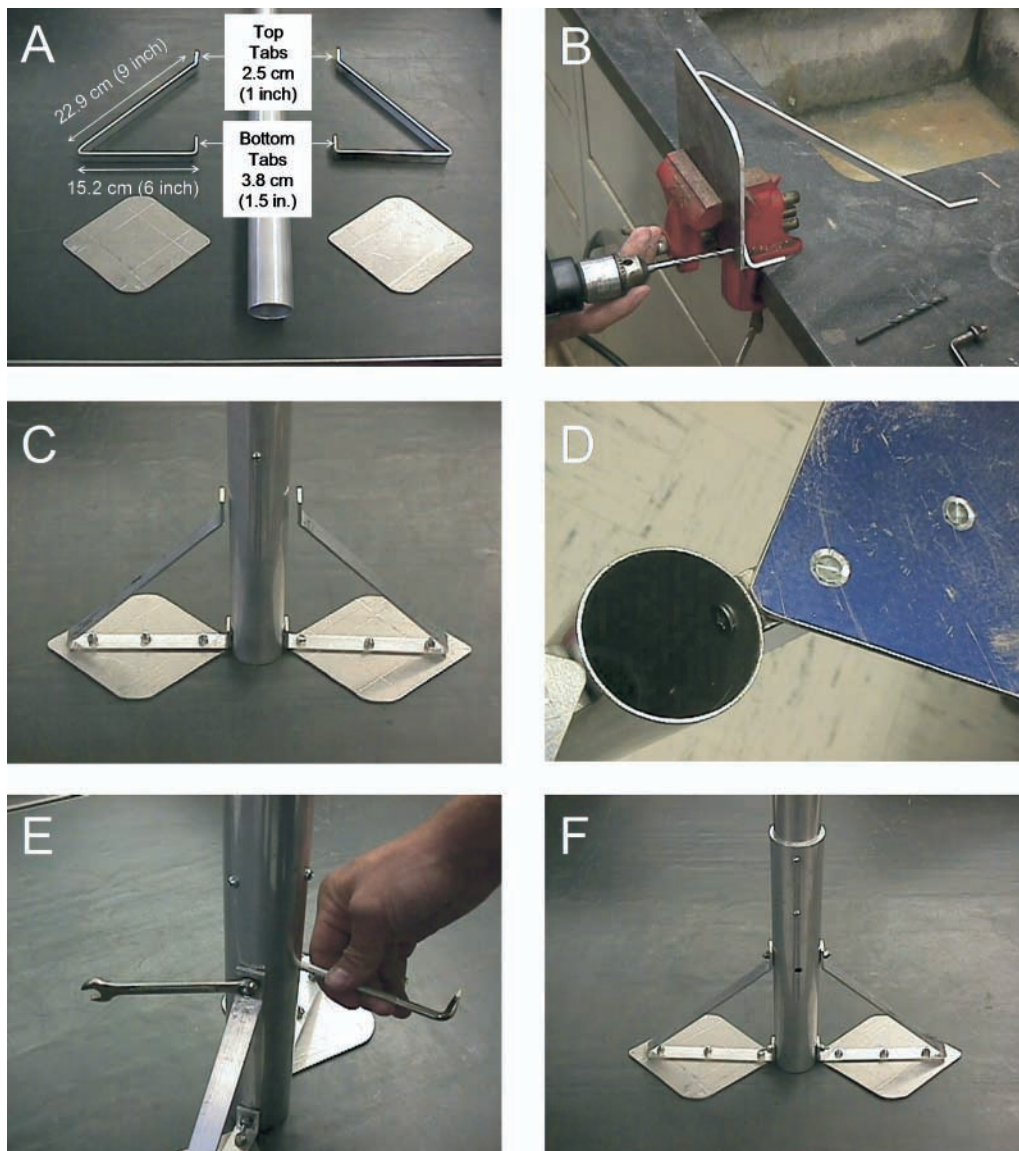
(A) Bent aluminum strap, with dimensions, and diamond-shaped aluminum plates shown with cut tubing. (B) Drilling through the aluminum plates and strap. After drilling to accept no. 10 flat-head screws, the hole is countersunk. (C) Feet and tubing positioned for marking drill holes on the tubing through the holes already drilled in the tabs of the feet. (D) Detail showing one of the wafer-top screws fastening the bottom tab of one foot to the tubing. The wafer top fits into the oversize (0.8-cm) hole to allow clearance for the access tube to fit inside. (E) Right angle screwdriver inserted through the third hole in the tubing to prevent the wafer-top screw from turning as the lock nut is tightened. (F) Assembled stand (top not shown).
